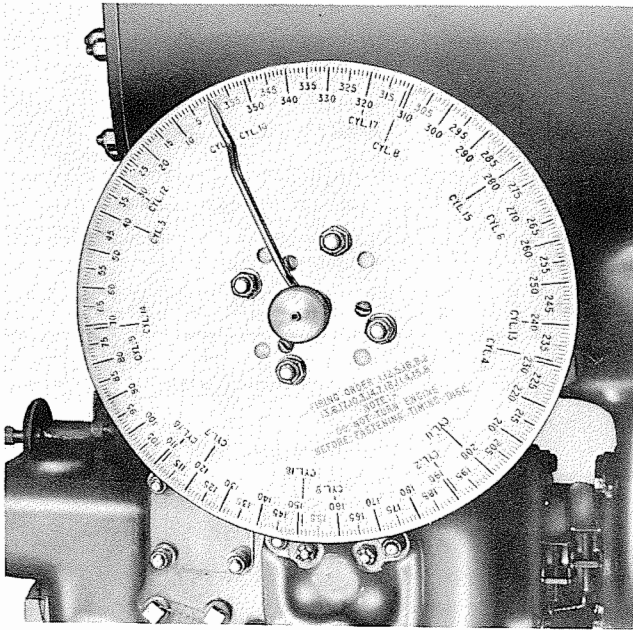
Timing Disc Installed on Fuel Pump Pad
